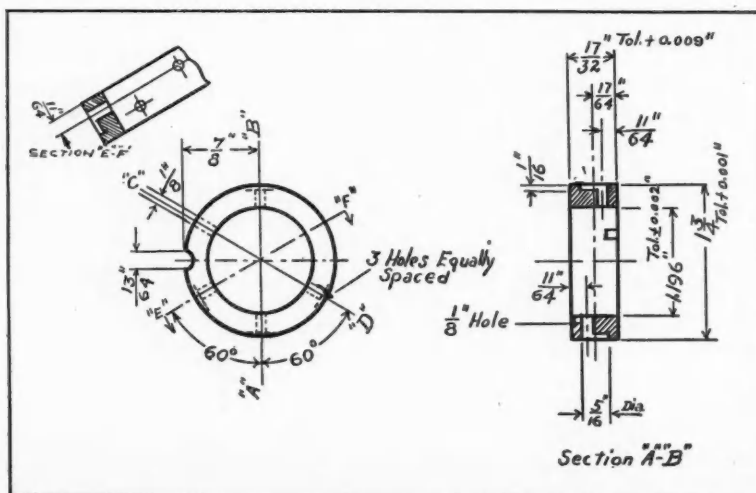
Drawing of the bushing inspected on the standardized layout in Fig. 1
